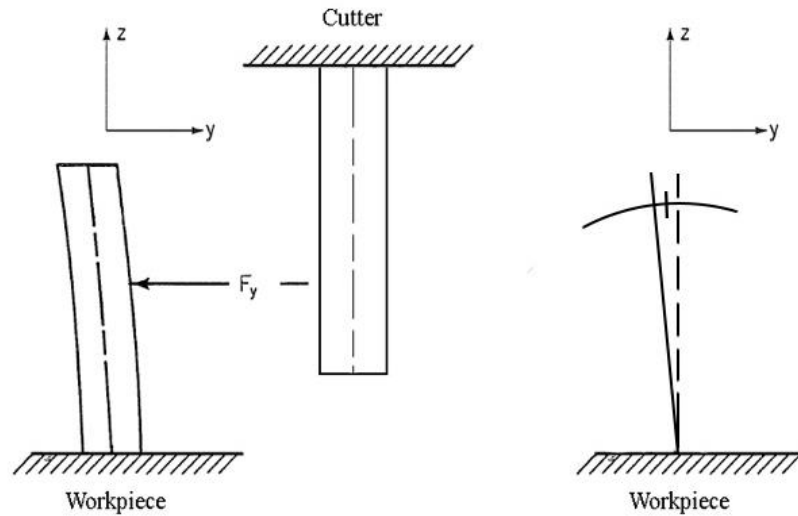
Workpiece deflection under cutting conditions creating angled surface
